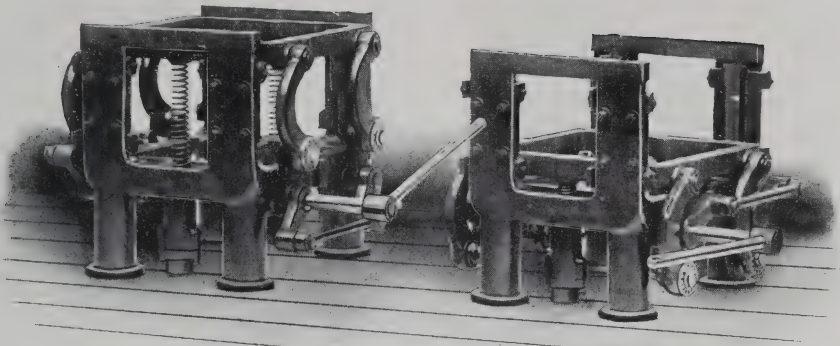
18 IN. BY 18 IN. HEAVY DOUBLE SHAFT MACHINES, SHOWING PATTERN CARRYING TABLE IN BOTH POSITIONS.
